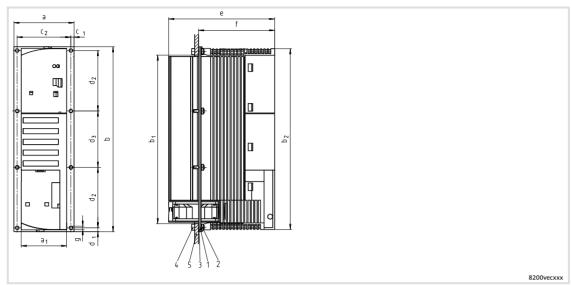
Dimensions for thermally separated mounting 1.5 ... 2.2 kW
